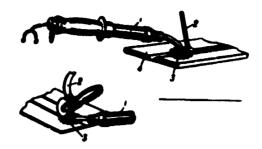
Welding of thermoplasts with gasous heat-transfer agents: 1) Welding torch; 2) rod material; 3) heating zone; 4) material to be welded.
